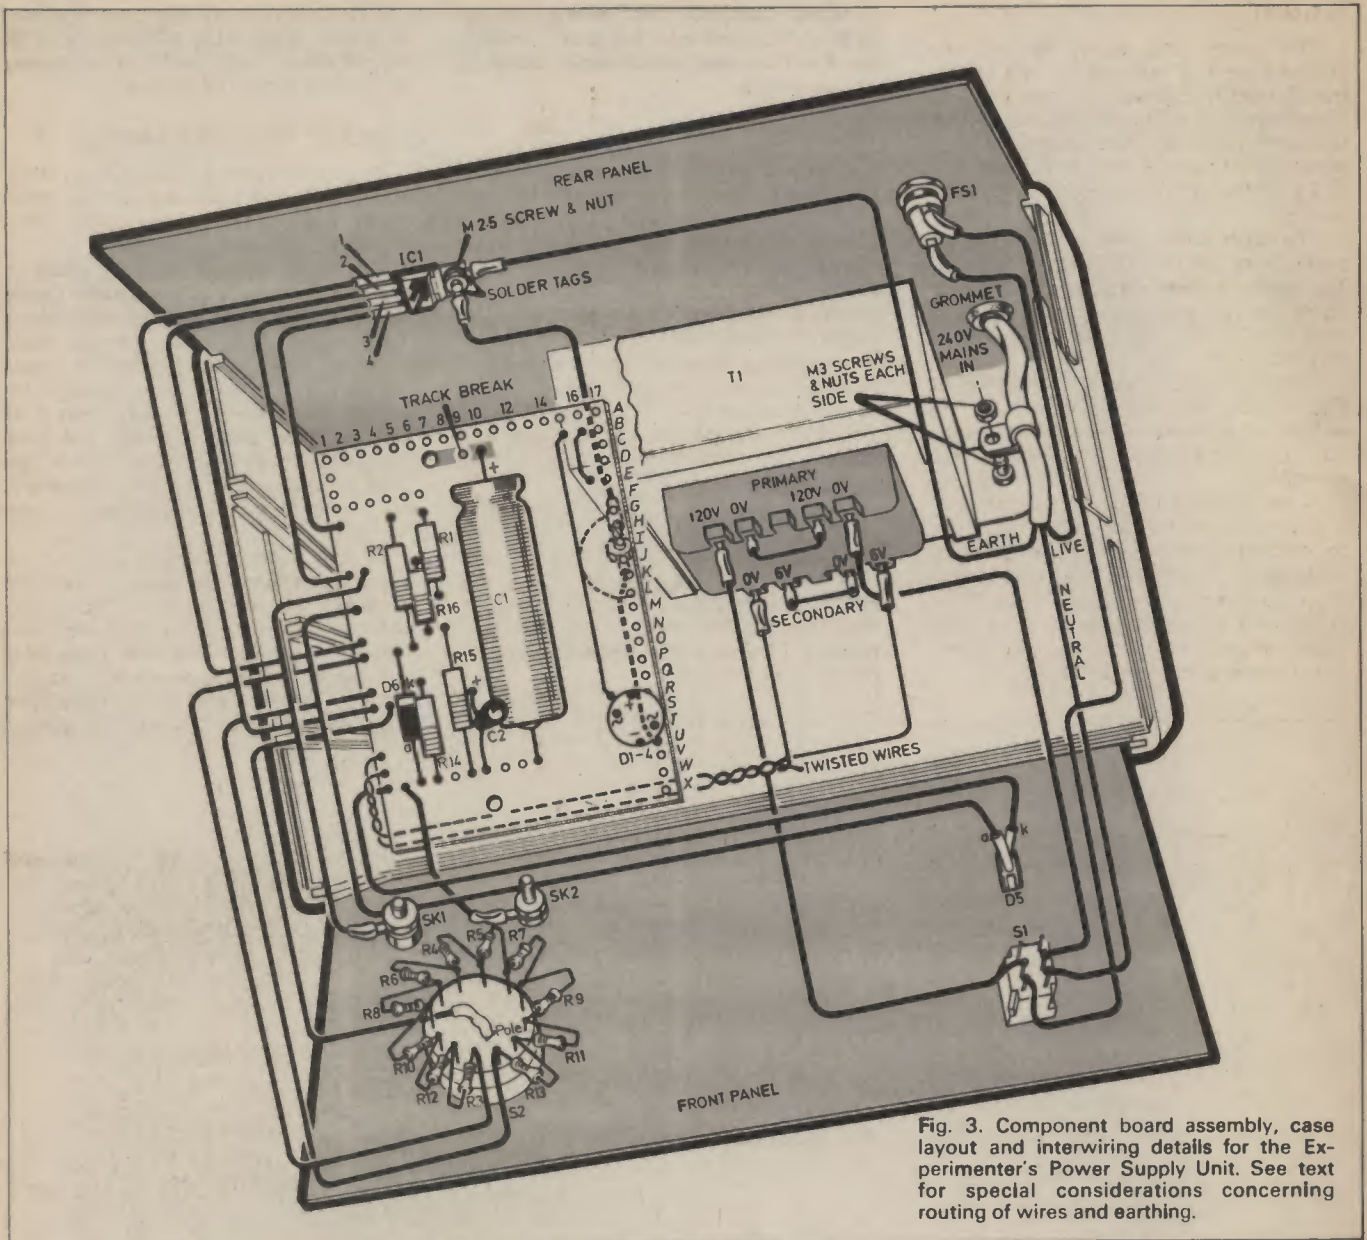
Component board assembly, case layout and interwiring details for the Experimenter's Power Supply Unit. See text for special considerations concerning routing of wires and earthing.
